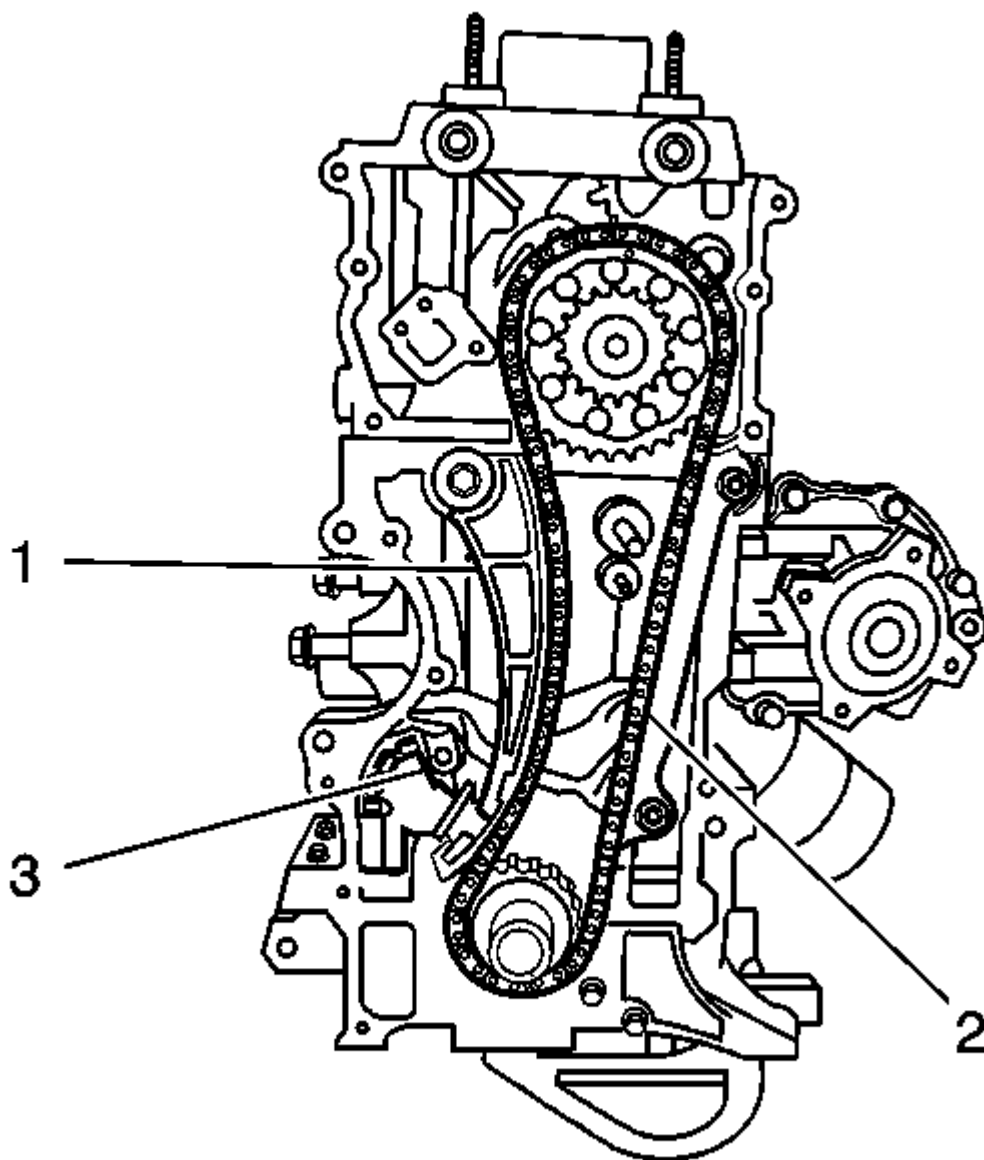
View Timing Chain Tensioner, Adjustable Guide & Fixed Guide
